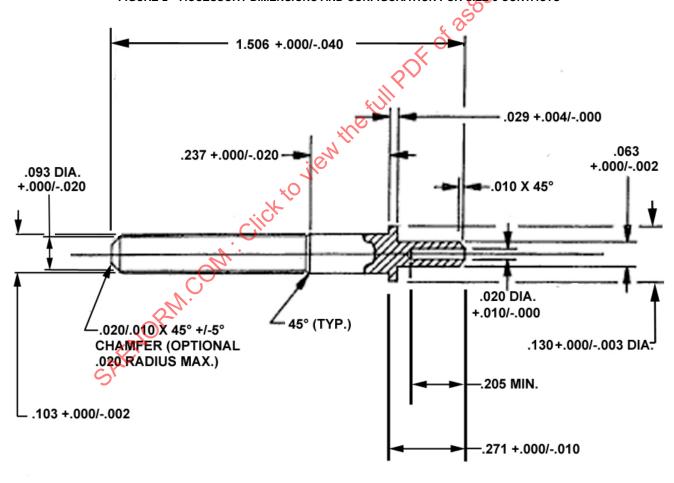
ACCESSORY DIMENSIONS AND CONFIGURATION FOR SIZE 16 CONTACTS
